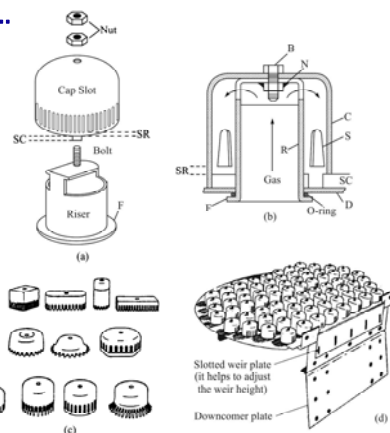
Bubble caps and a bubble-cap tray: (a) an exploded view of a bubble cap and (b) sectional diagram of a bubble cap [B: bolt; C: cap; D: tray deck; F: flared bottom of the riser; N: nut; R: riser; S: slot; SC: skirt clearance; SR: shroud ring]. Courtesy: ACS Industries, USA; (c) different types of bubble-caps and (d) a bubble-cap tray
